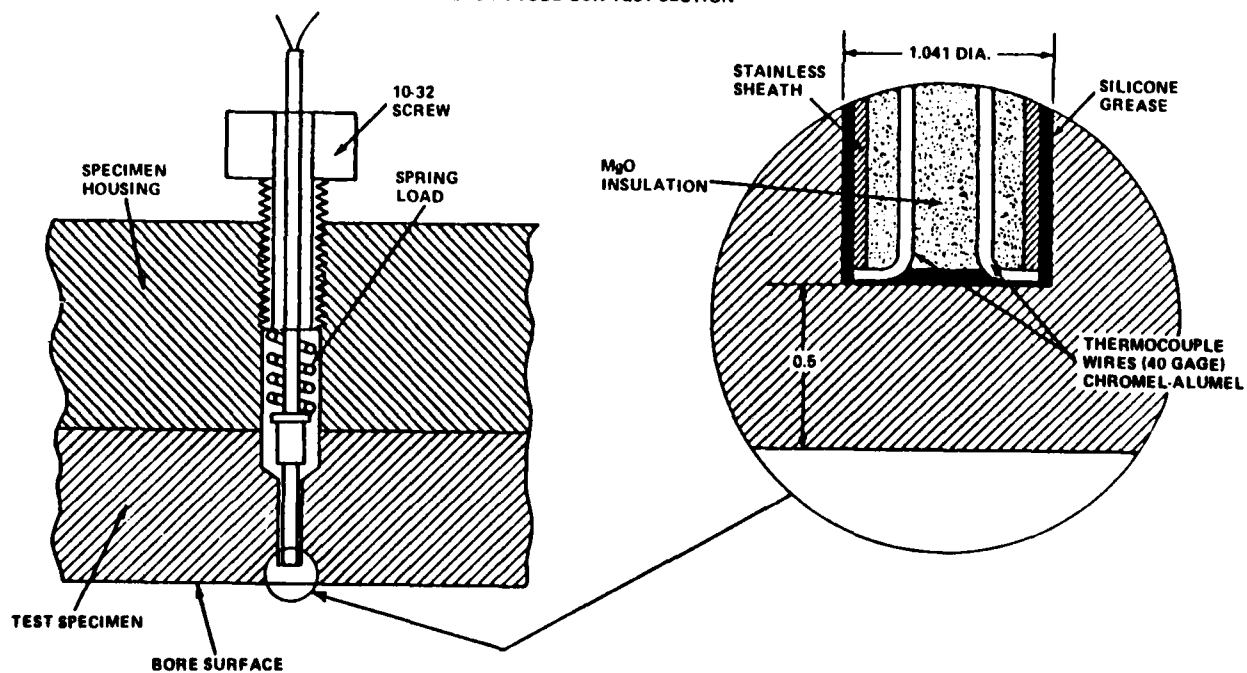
In-wall thermocouple installed in the Shock Tube Gun test section
